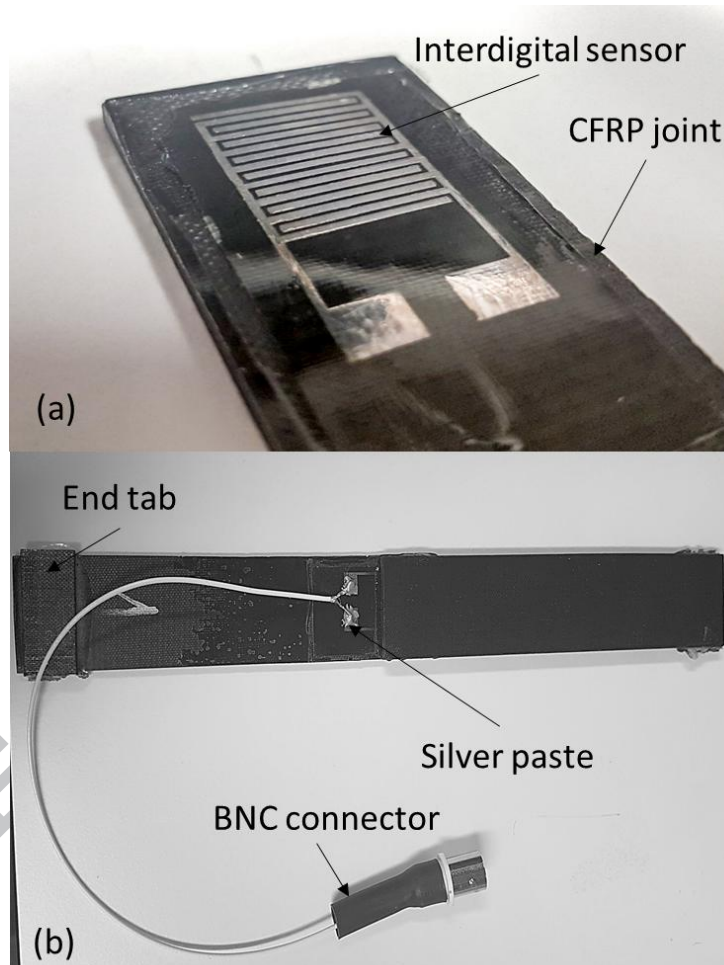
(a) Inkjet-printed sensor and (b) single-lap joint specimen
